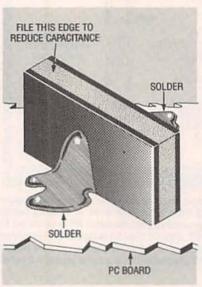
TO MAKE C10, take a small square of G-10, 0.062-inch PC board material and trim it to a 1/10-inch square. Install it on the solder side of the board in the location shown in Fig. 6.
